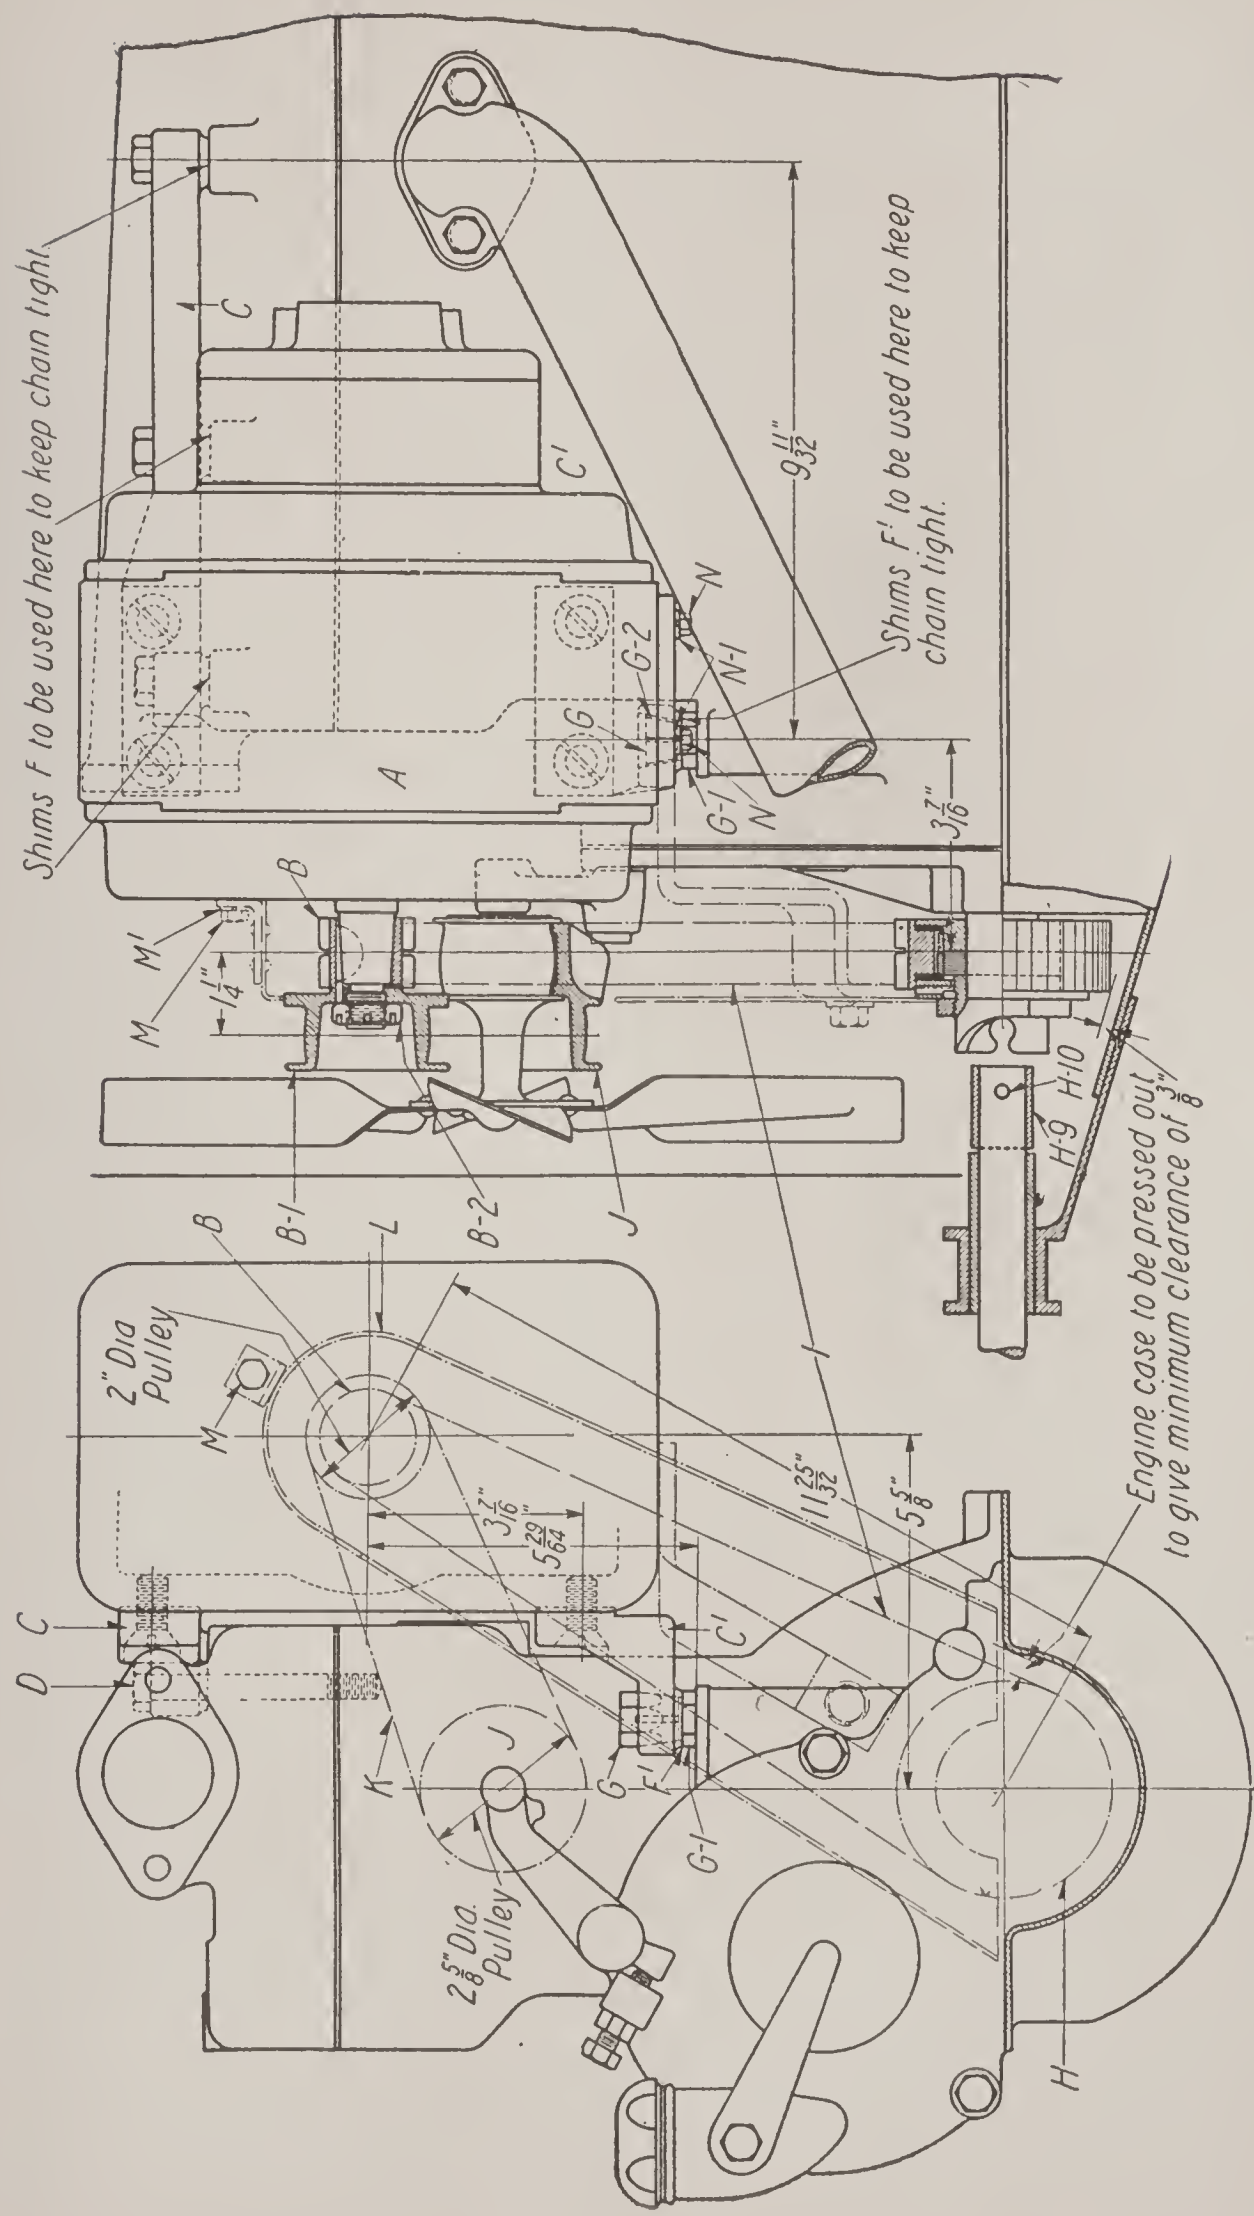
End and Side Elevations of Westinghouse Ford Installation, Showing Correct Position of Parts on Engine
